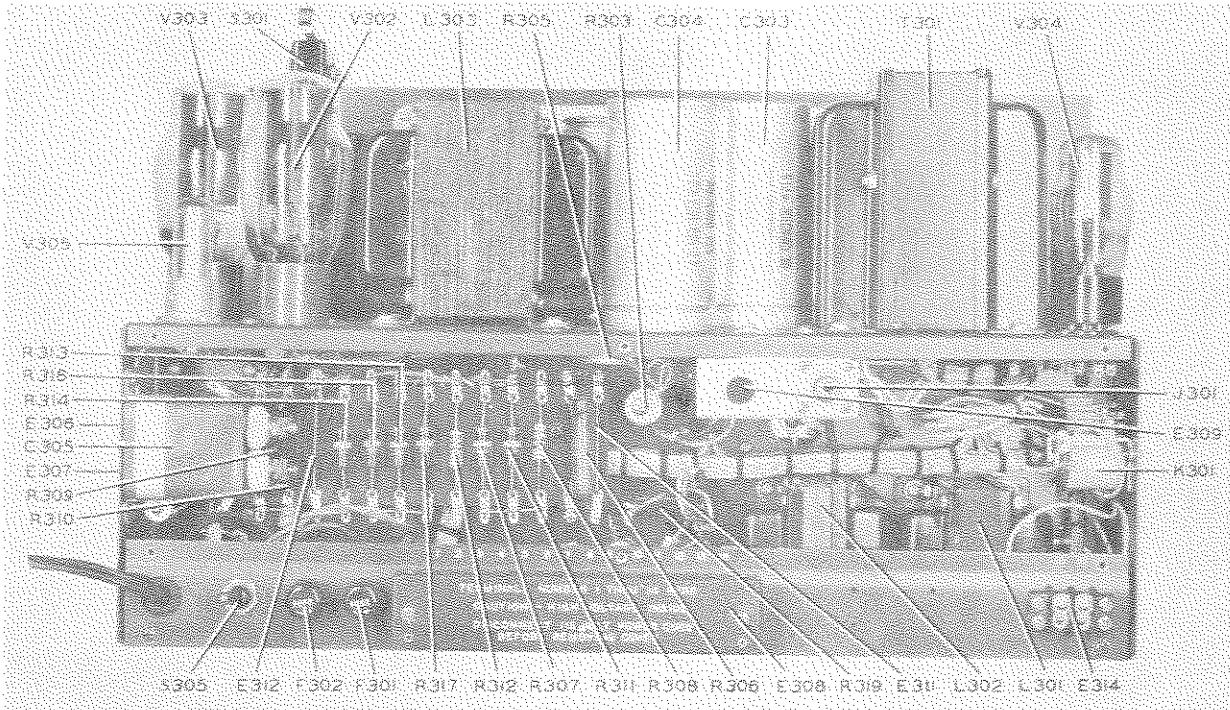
32V-2 Parts Arrangement - Rear Open
